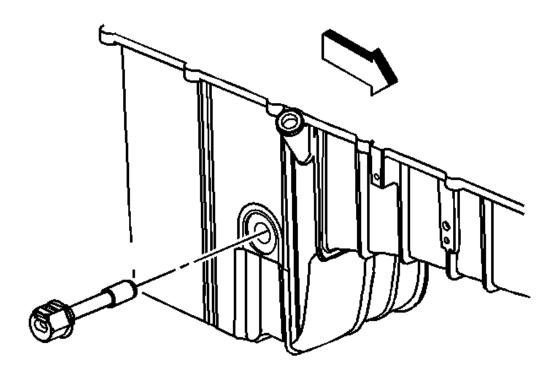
View Of Oil Level Sensor Courtesy of GENERAL MOTORS CORP.
